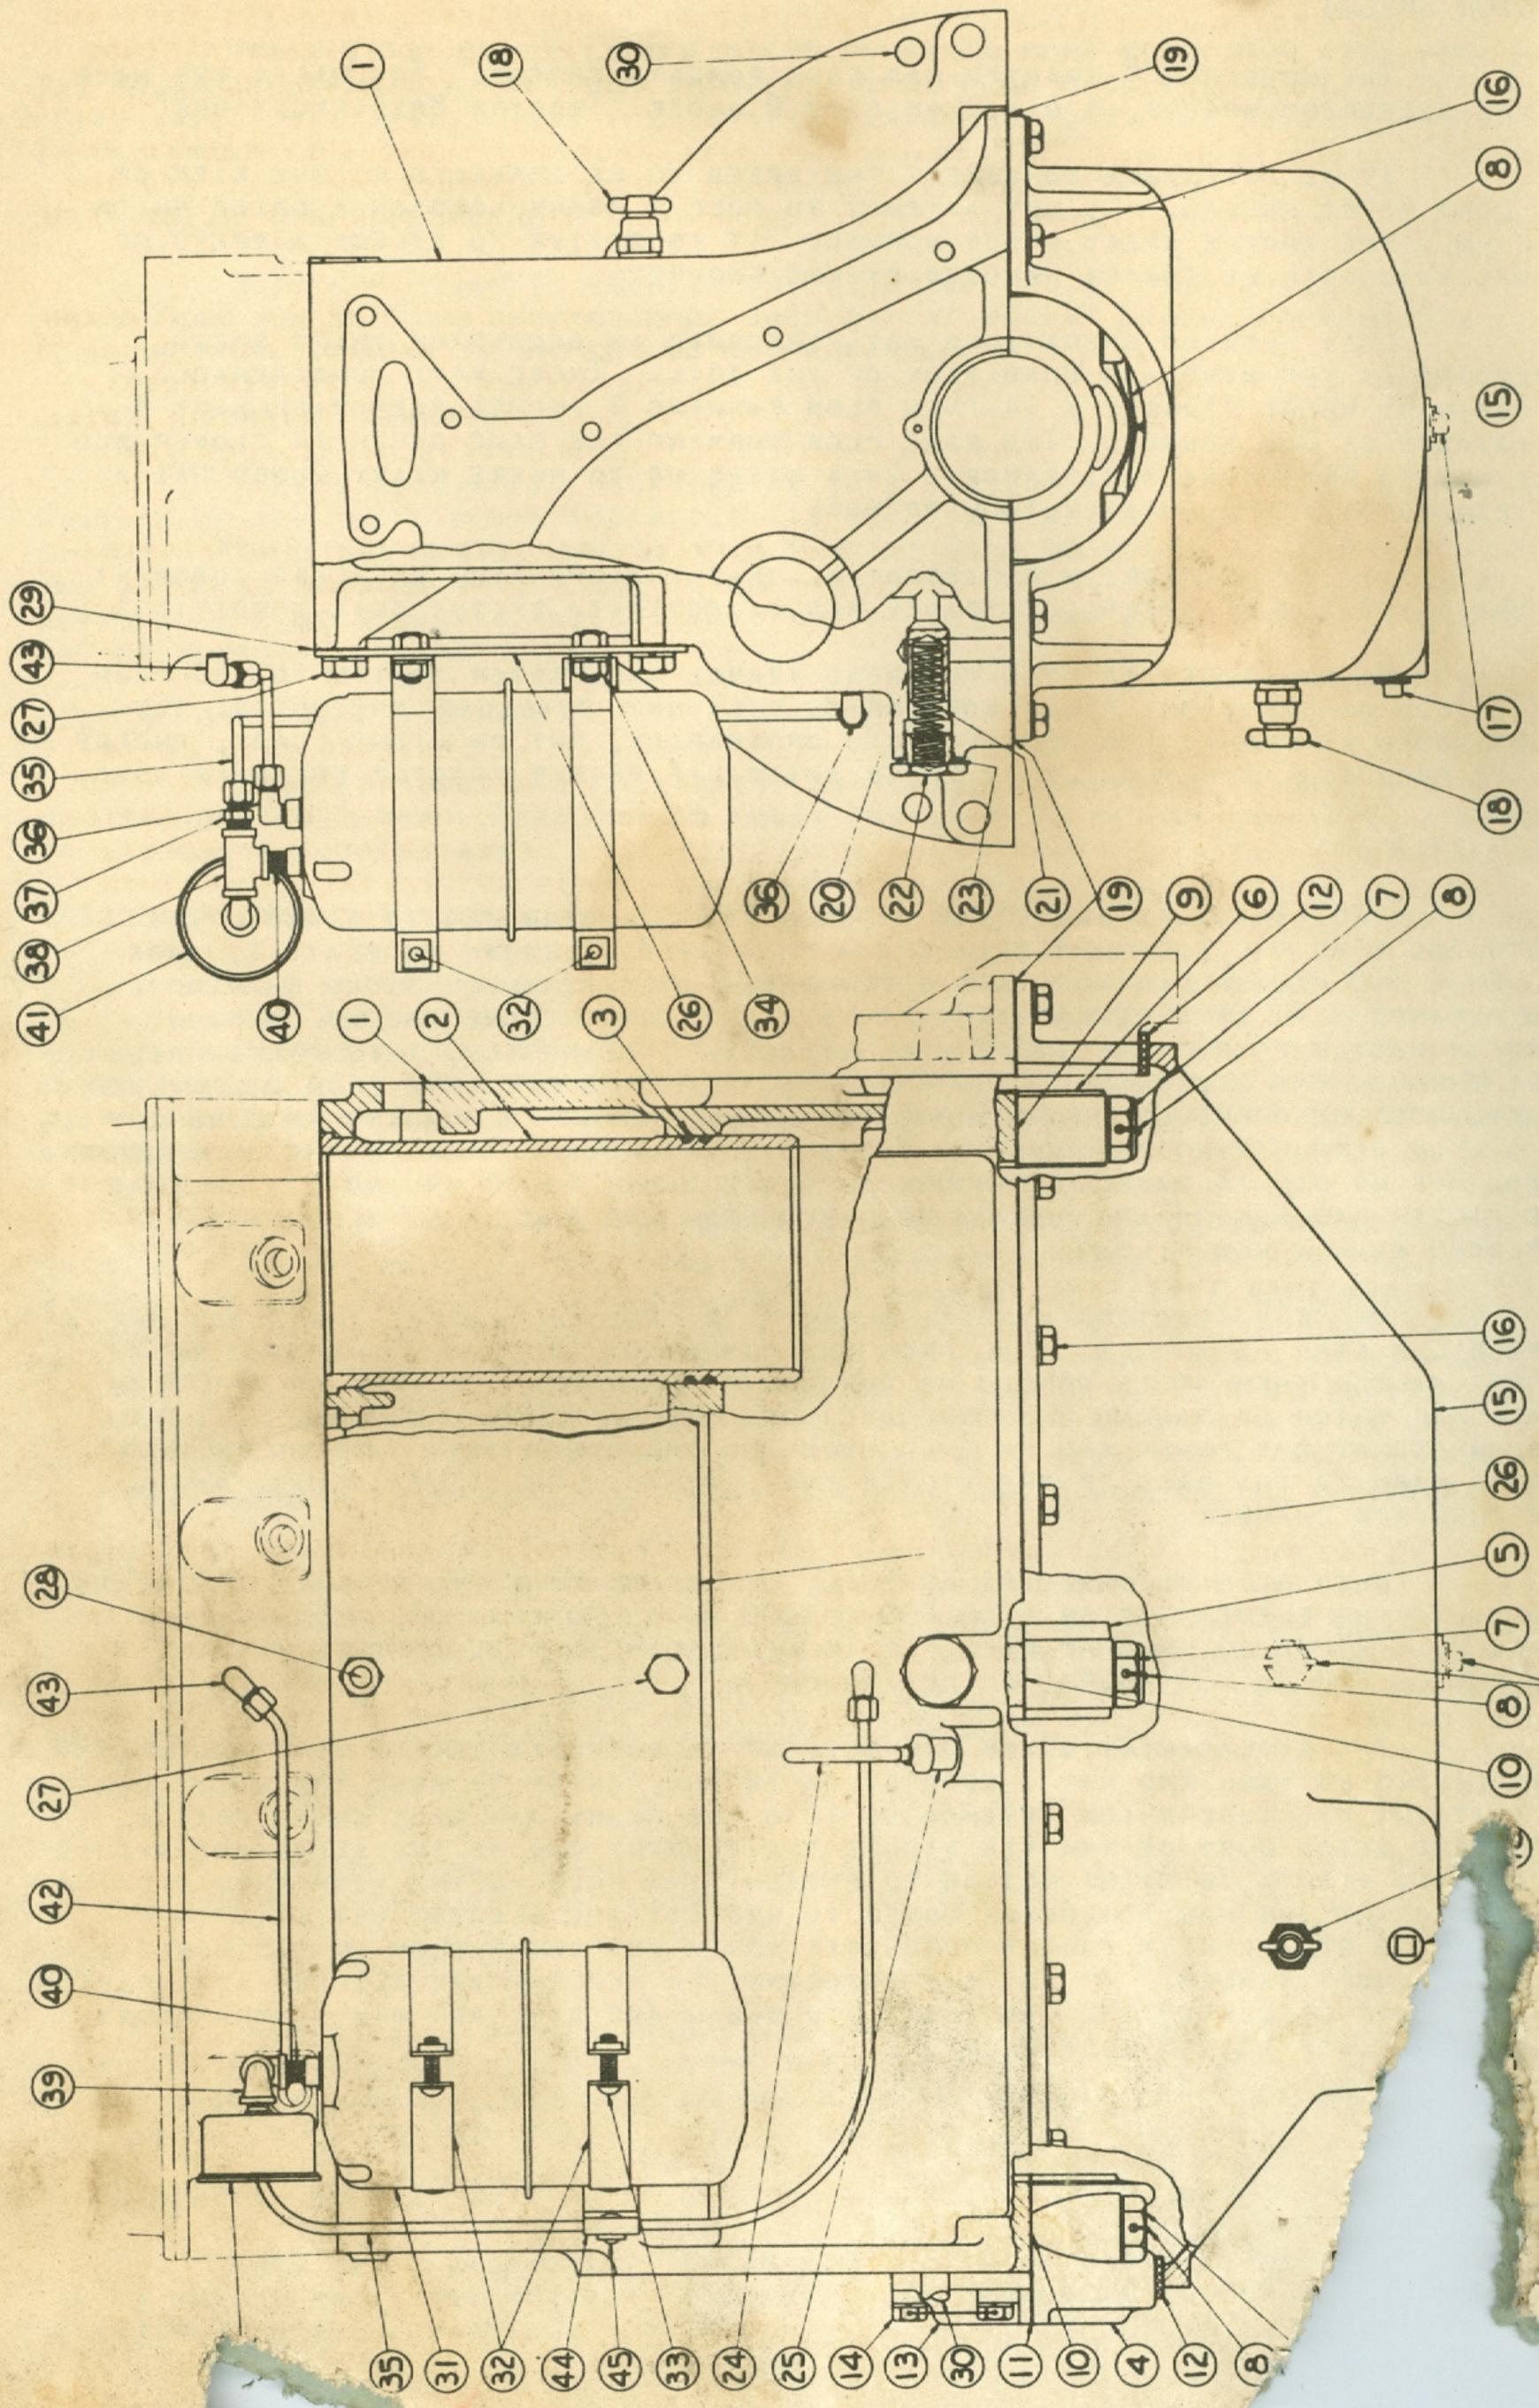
CYLINDER BLOCK, OIL PAN, OIL FILTER
